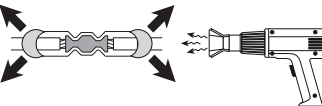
DETAIL “HEATSHRINKABLE CRIMP SEALED CONNECTOR”:
